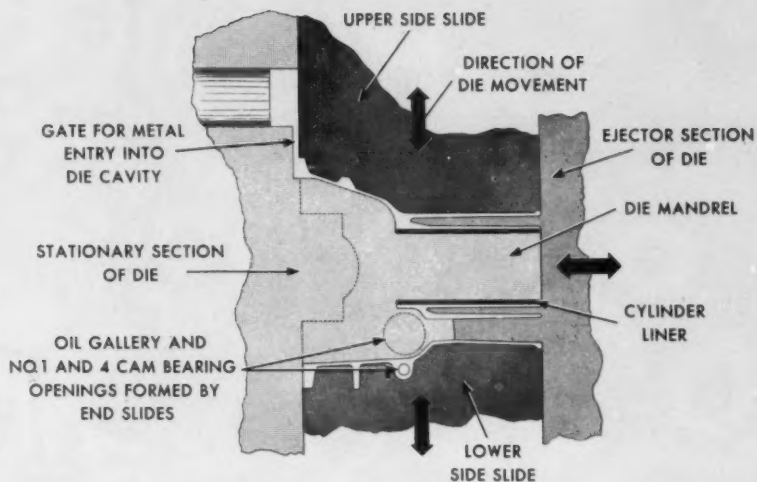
Cross-sectional drawing of die for casting six-cylinder aluminum engine blocks. Cast-iron liners are in place when the block is cast.
